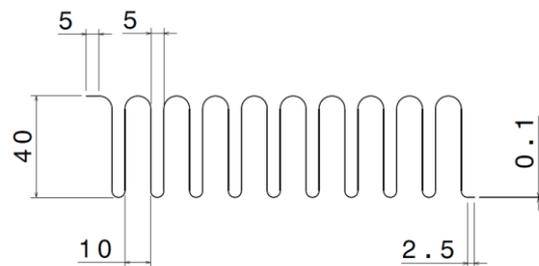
Detail of the geometry of the heat transfer surface. Dimensions in mm.
